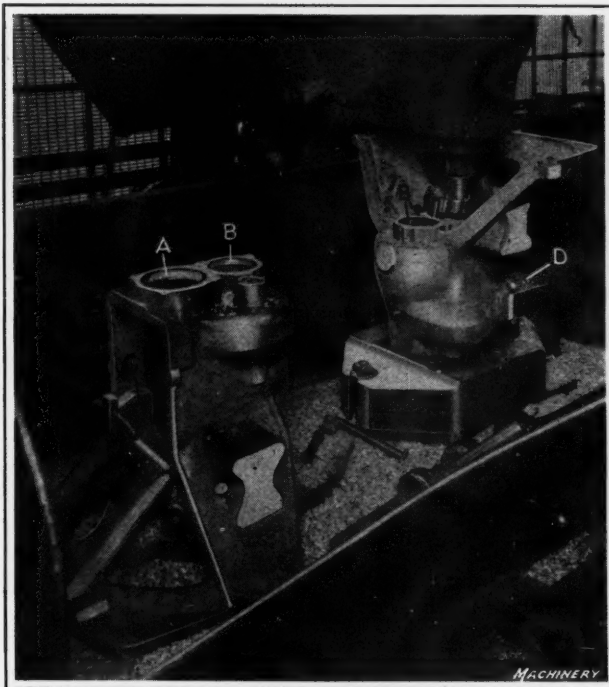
Vertical-spindle Milling Machine equipped with Double Jig for facing Ends of Main Shaft and Countershaft Bearings
